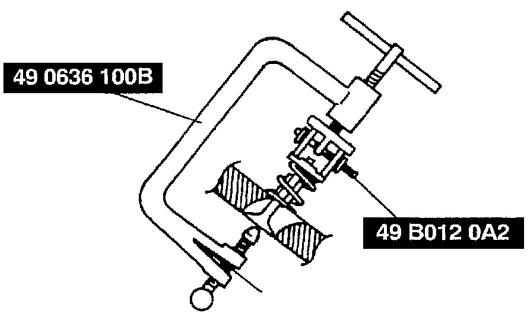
Disassembling Cylinder Head (II) Courtesy of MAZDA MOTORS CORP.
